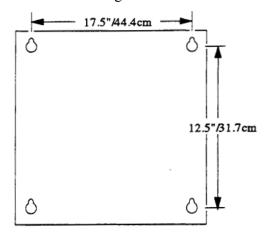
Superterm Cabinet Mounting Hole Dimensions
